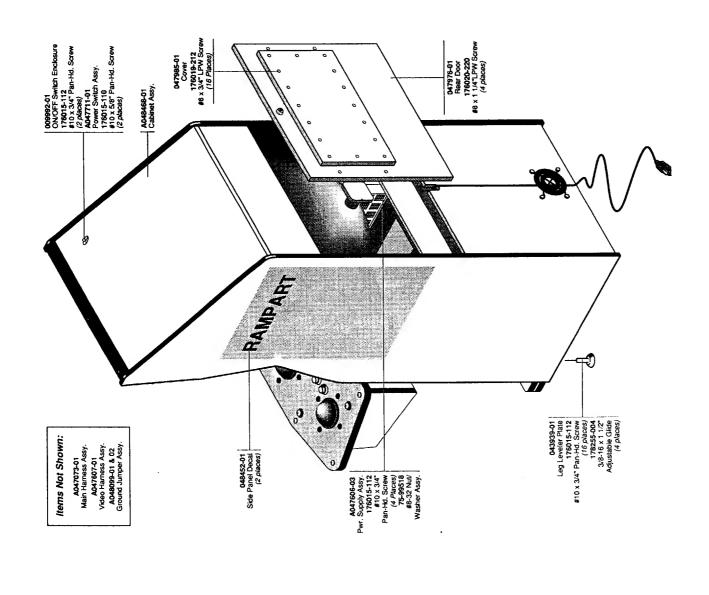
Cabinet-Mounted Assemblies A048470-01 B
